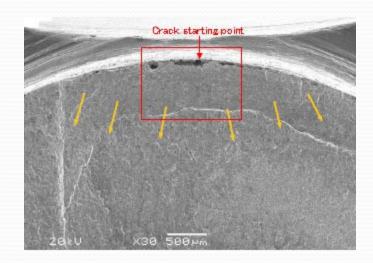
DETAILED INSPECTION-FRACTURE SURFACES
